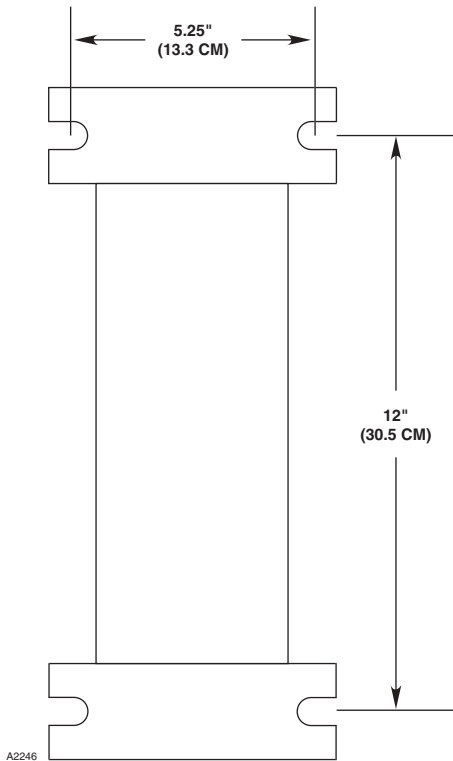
Hole Pattern for Flat Surface Mount Adapter
